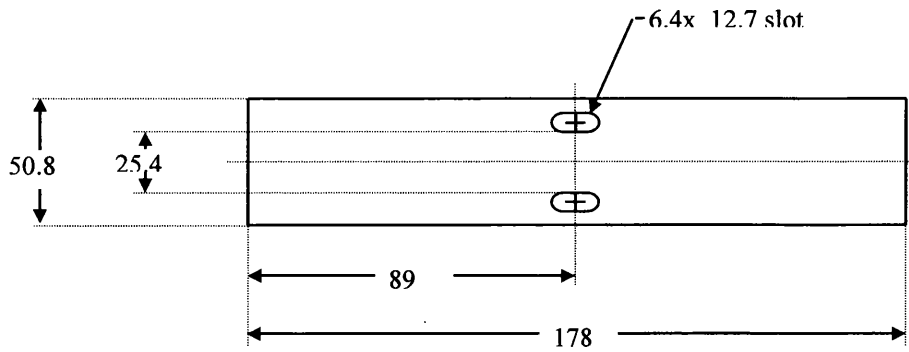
Dimensions of the manufacturer's standard dilatometry sample for use in a Gleeble thermomechanical simulator. All dimensions are in mm.
